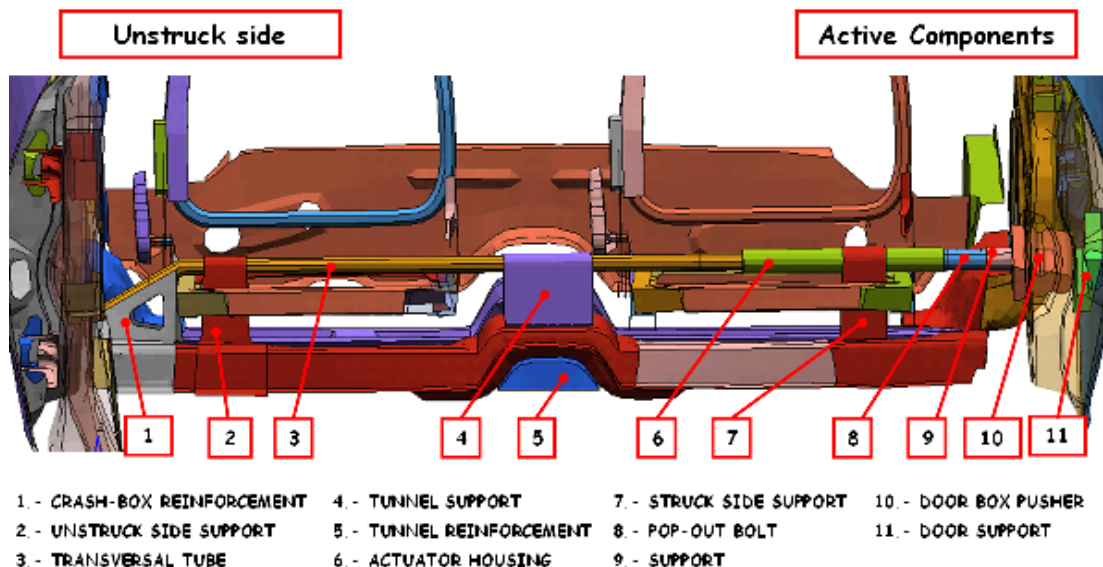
Actuator layout; Cross section of vehicle floor (transversal direction)
